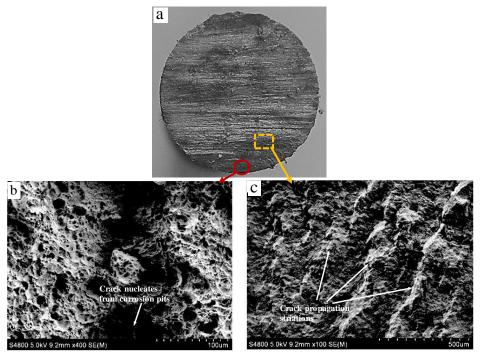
Fracture morphology (a. overall appearance; b. crack nucleation zone; c. crack propagation zone).
